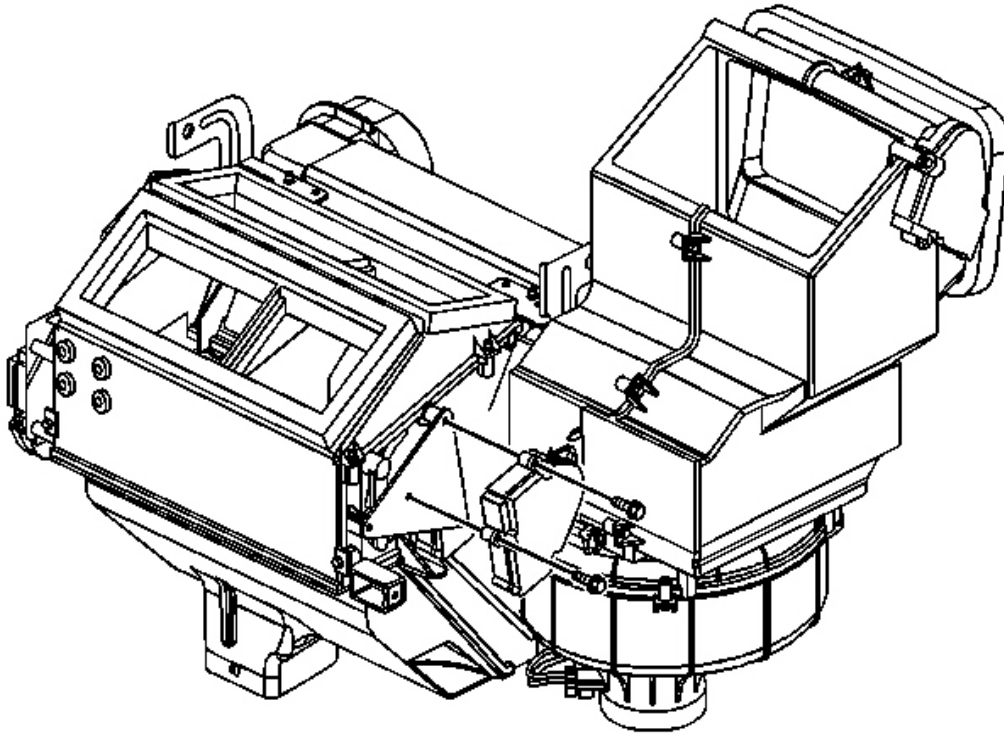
View Of HVAC Module, Air Temperature Actuator & Retaining Screws
